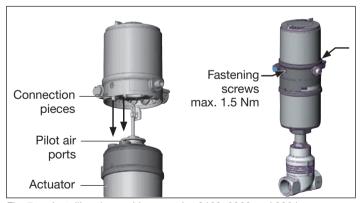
Installing the positioner, series 2103, 2300 and 2301
